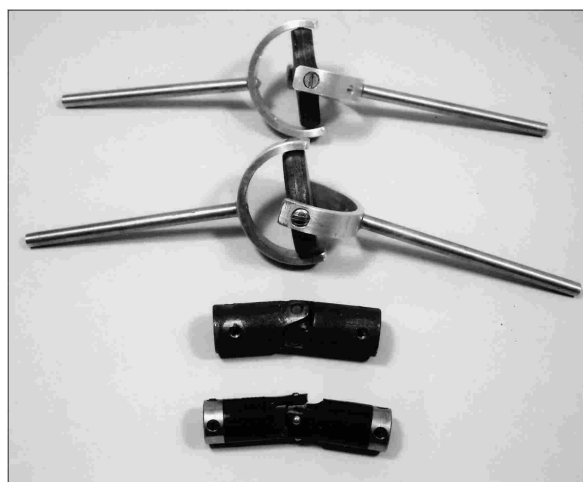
Demonstration examples of 'single' Hooke's joints. Top to bottom: (a) with a cross-shaped interior member, (b) with a disc-shaped interior member, (c) two commercial versions.
